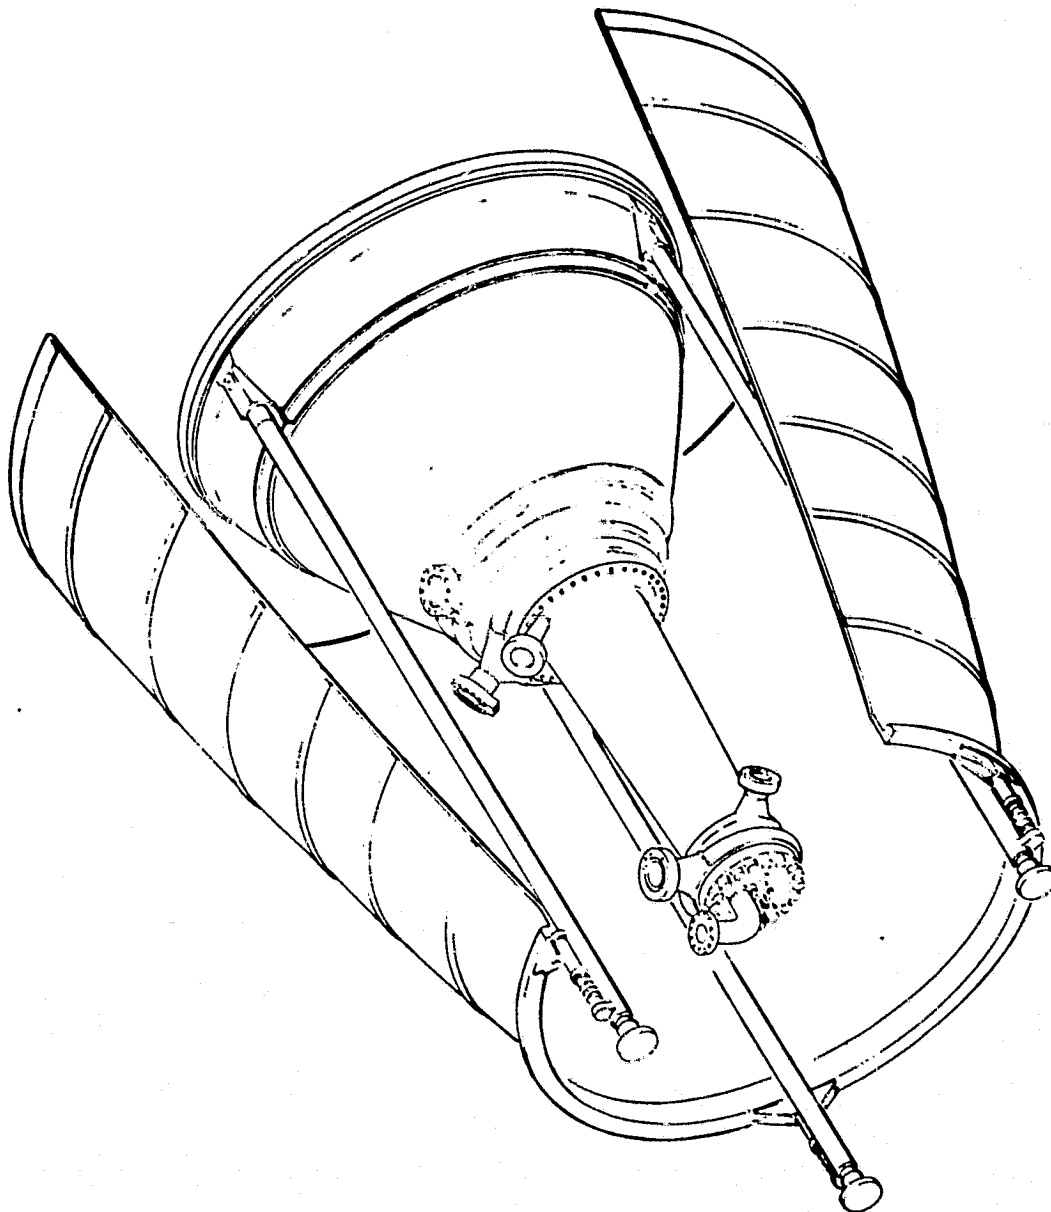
Advanced Expander Cycle Engine Point-Design, Thrust Chamber Assembly
